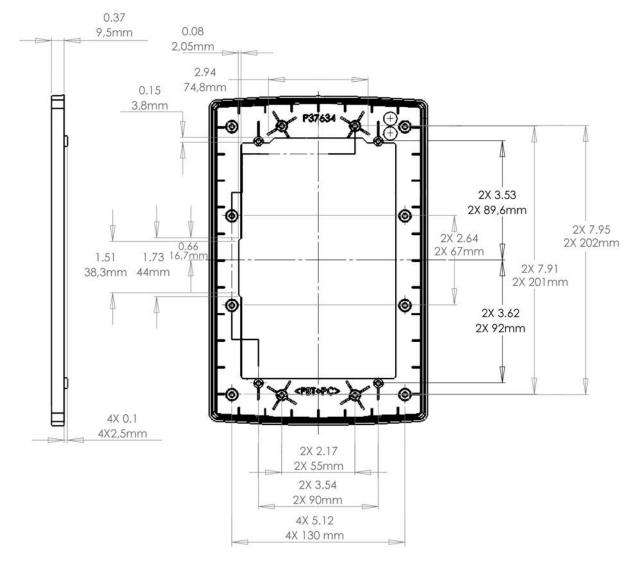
Dimensional drawing, rear view touchscreen wall control unit, SK enclosure integrated (dimensions are in inches/mm)
